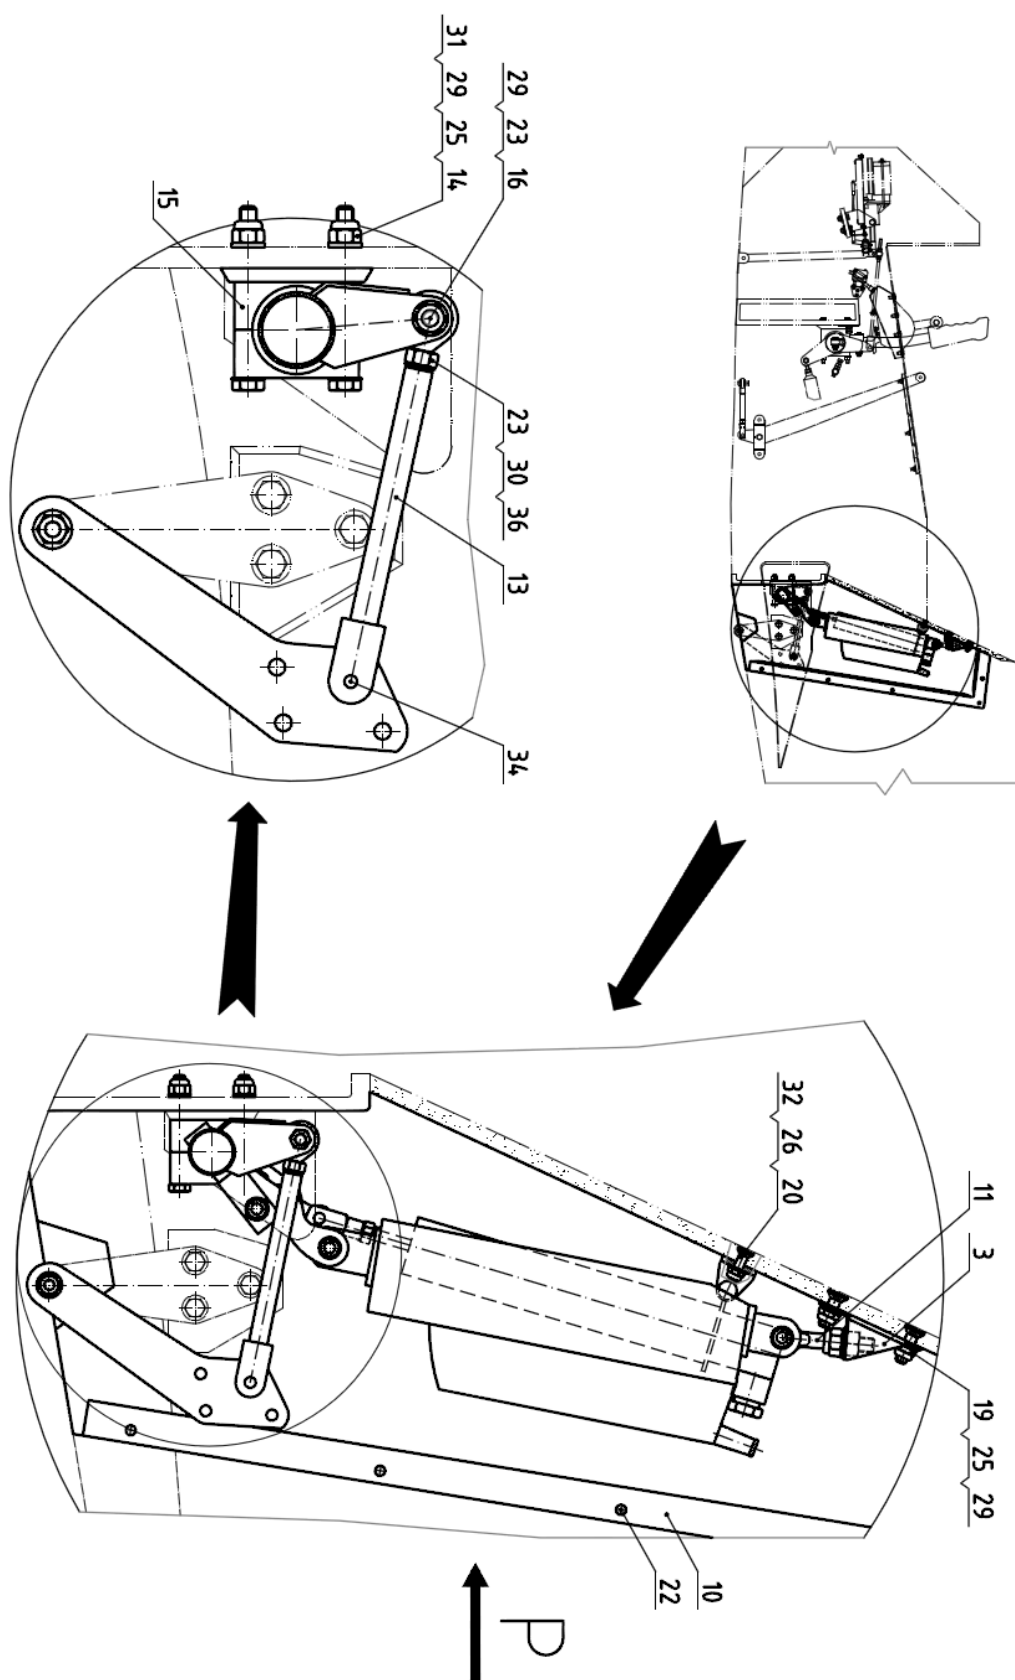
Electrical Flap Control System Removal / Installation (page 1 of 3)
